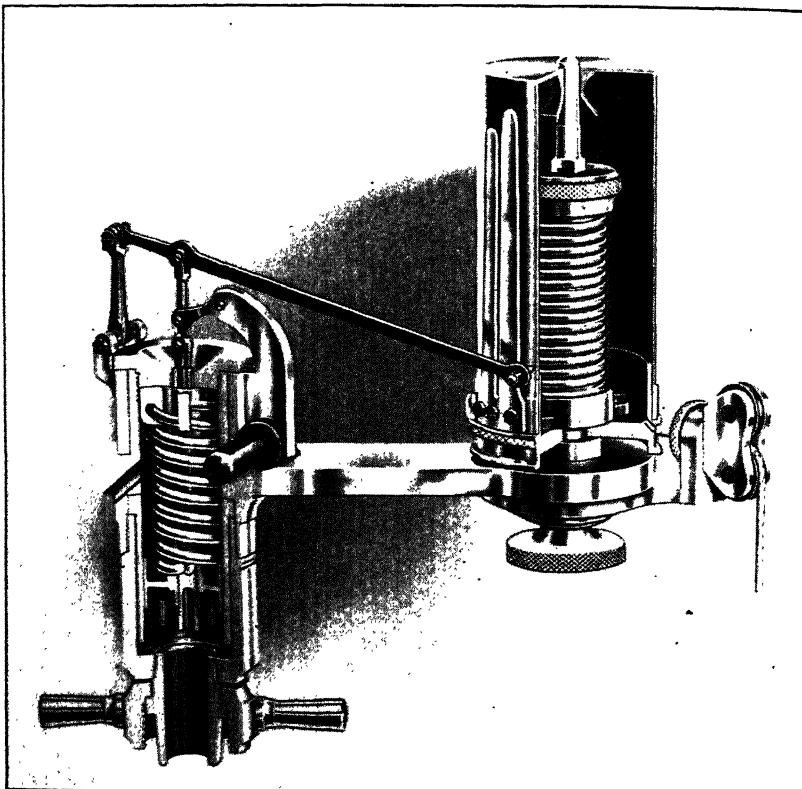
Steam-Engine Indicator (Courtesy Crosby Steam Gage and Valve Co., Boston).
